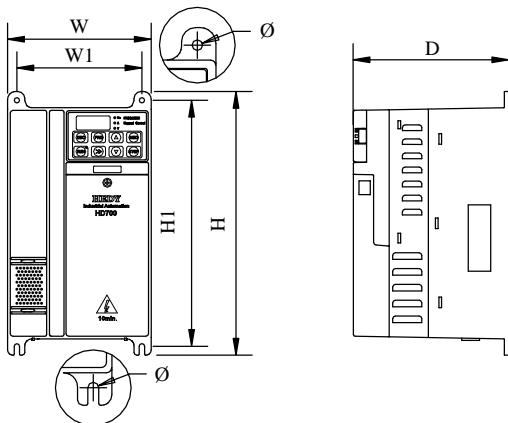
Mechanical dimensions and mounting (Size A, B, C)
